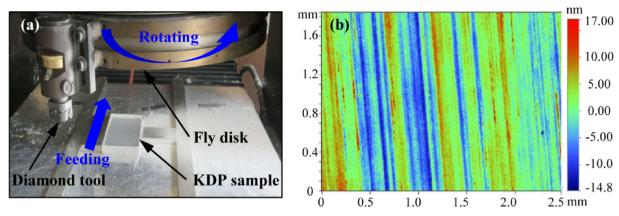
(a) A homebuilt SPDT machining set-up applied to fly-cut KDP samples and (b) the typical morphology of finished KDP surface.
